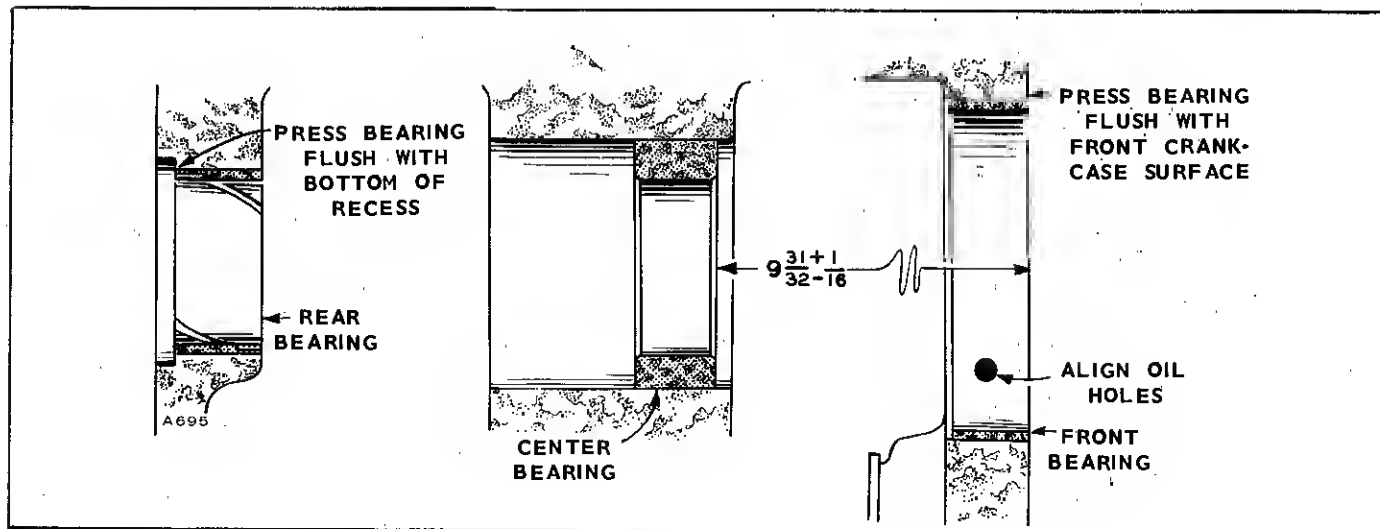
CAMSHAFT BEARING ALIGNMENT
